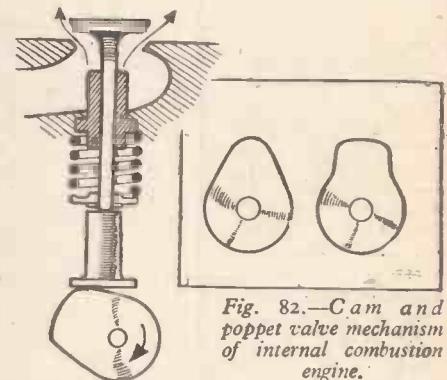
Cam and poppet valve mechanism of internal combustion engine.
